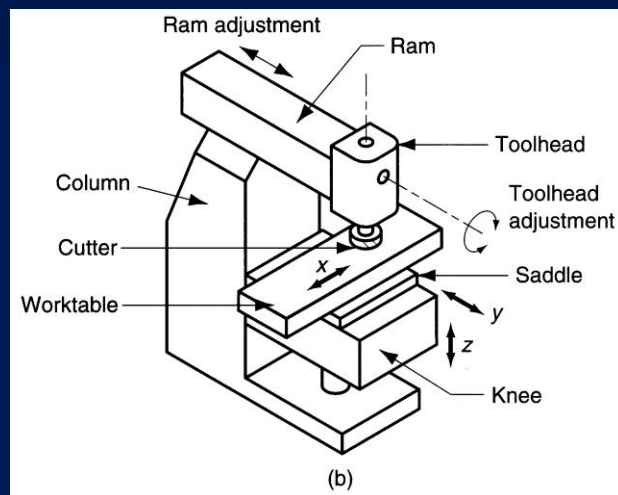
(b) ram type knee-and-column machine; ram can be adjusted in and out, and toolhead can be swiveled
